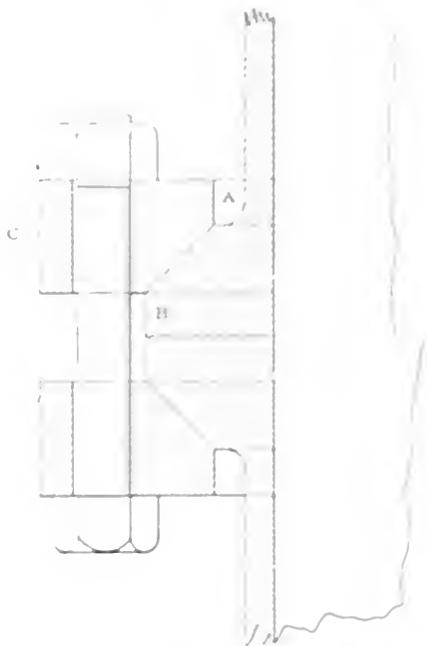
WELDED JOINT WITH A LOOSE TAPER FOR FLANGE.
